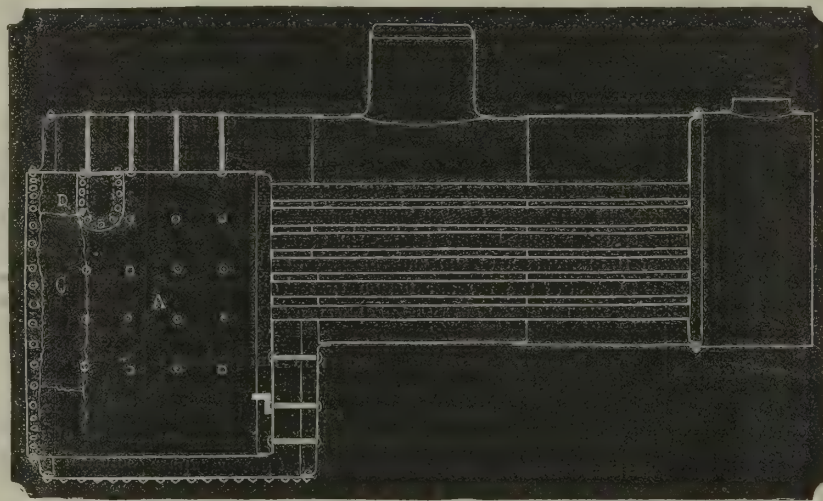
Longitudinal section of the boiler, showing lines of fracture of the left-hand wall of the fire-box, the corresponding end of the thin patch, and D, the probable point of initial rupture, indicated by the thin, pouted edges of the hole through which the head of the bolt was drawn, not shown in the cuts.
